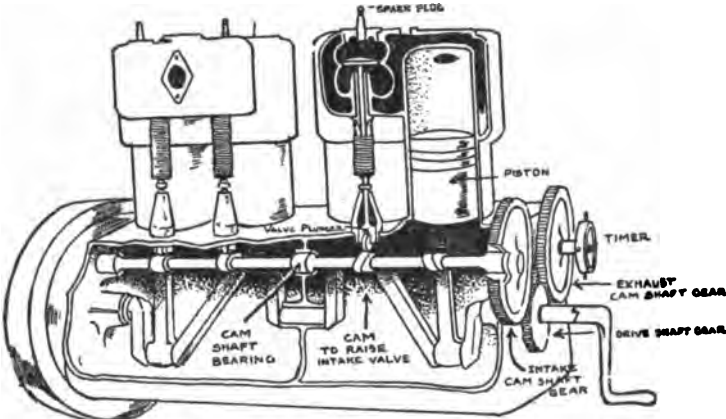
Illustrating how the cam shaft on a four cylinder engine is operated by timing gears. Also how the nose of cams raise the valves. There are two cam shafts placed opposite, therefore it would be a "T" head type.
